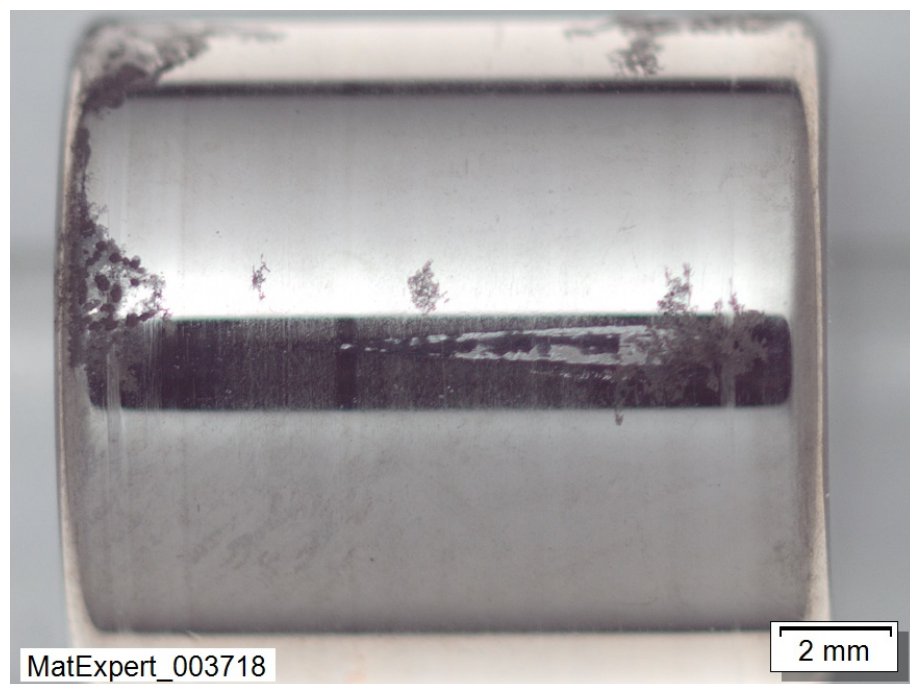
Bearing no. 3 – cylindrical roller with wear.
